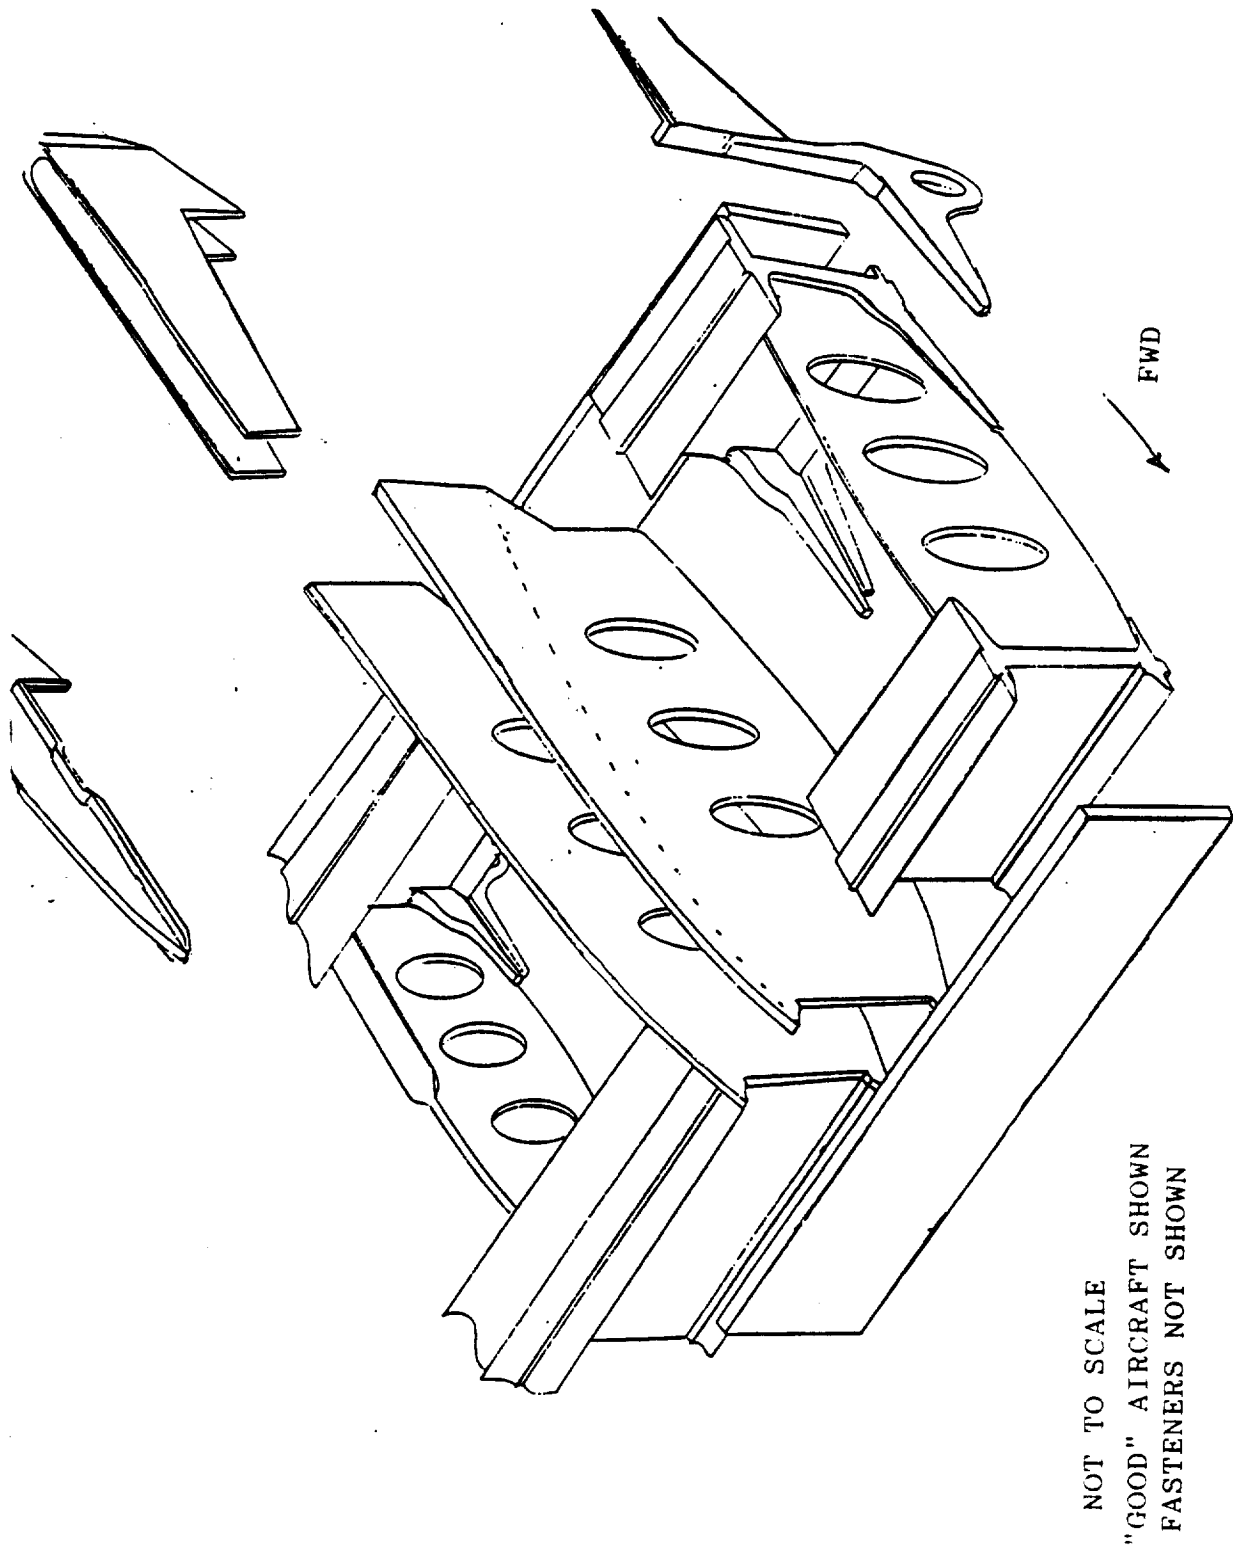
Boom to wing attachment parts break down for the Good and Bad airplanes.
